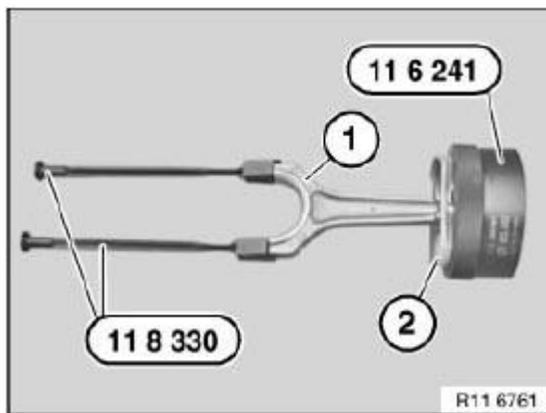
Identifying Piston And Connecting Rod With Special Tools (11 8 330 And 11 6 241)
